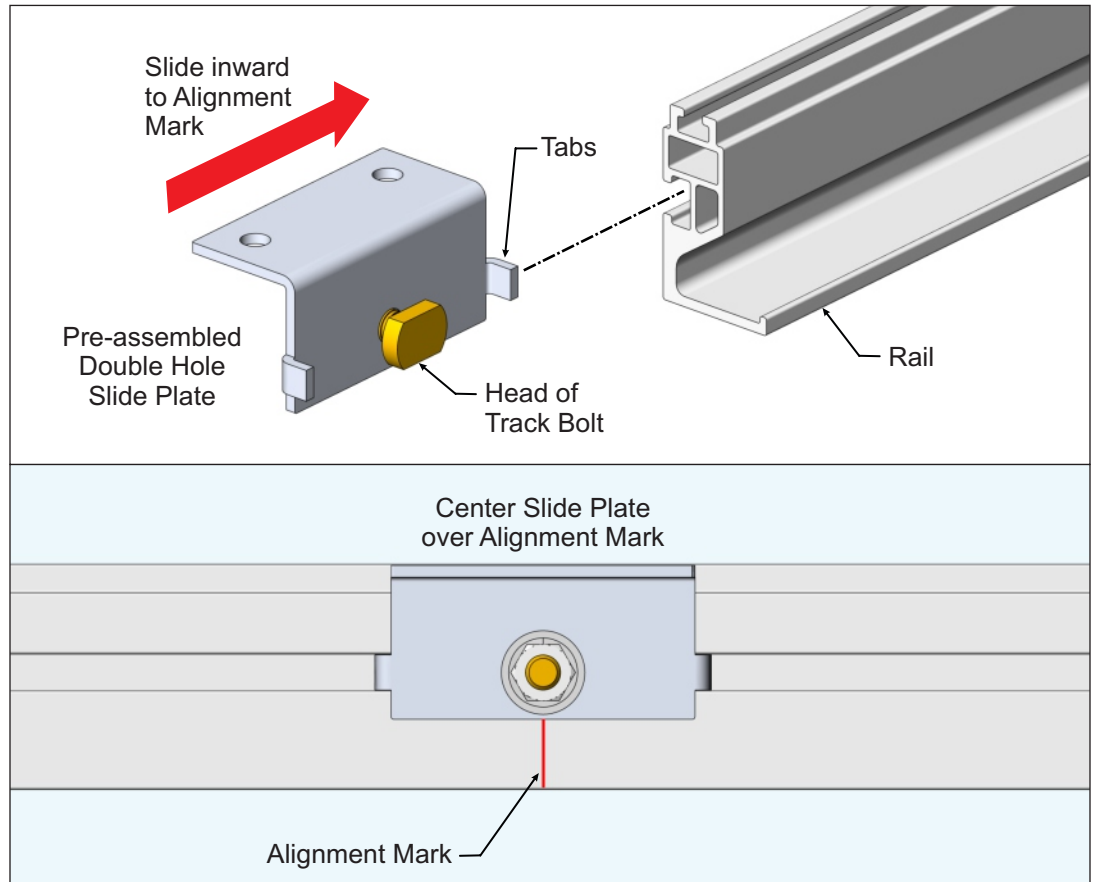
Installing and Aligning a Double Hole Slide Plate
